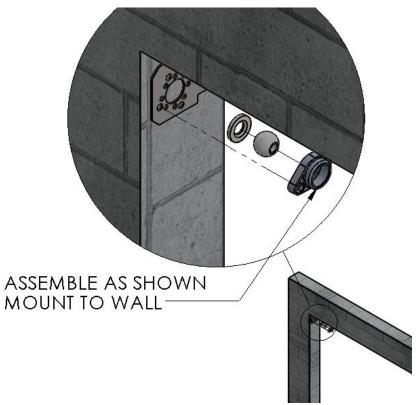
INSTALL HEADER BRACKET AND IDLER ASSEMBLY
